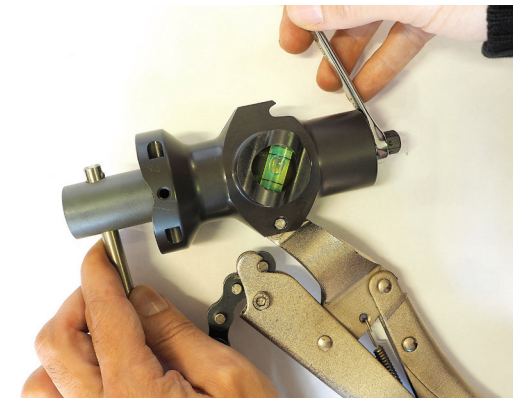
Use the cutter removal tool and spanner provided to remove or secure the cutters. Note the cutter removal tool's 15mm side (shallow) and 16mm side (deep).
